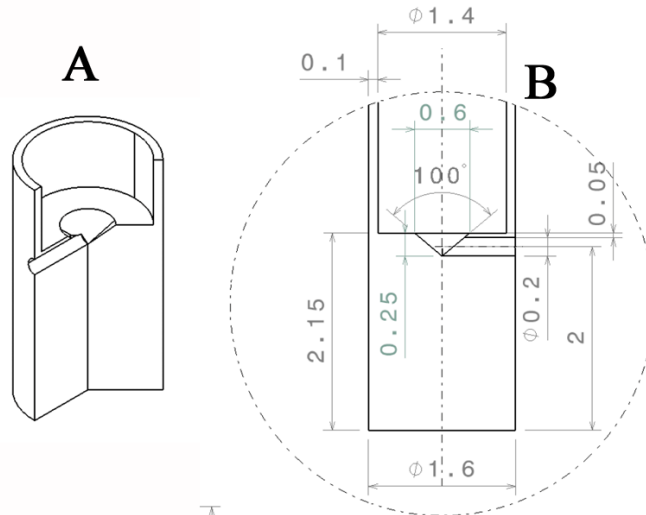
Single hole probe prototype tip detail. 3D section view (A) and tip dimensions given in mm (B).
